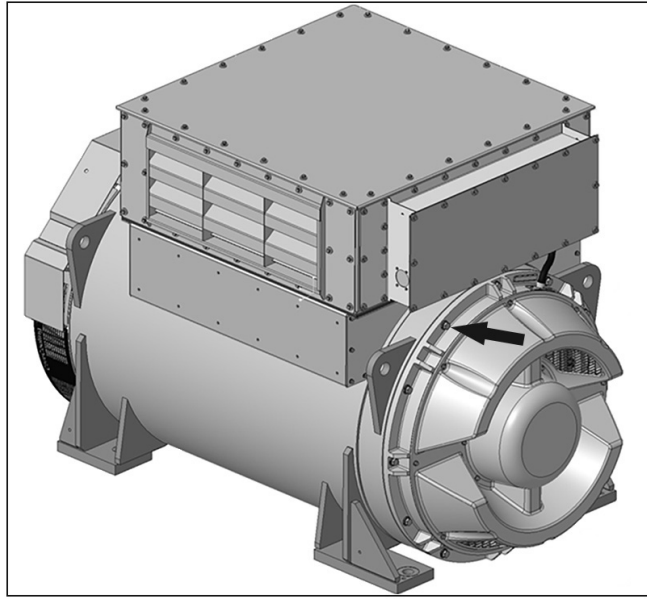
AIR INLET COVER REMOVAL AND FITTING INSTRUCTIONS
